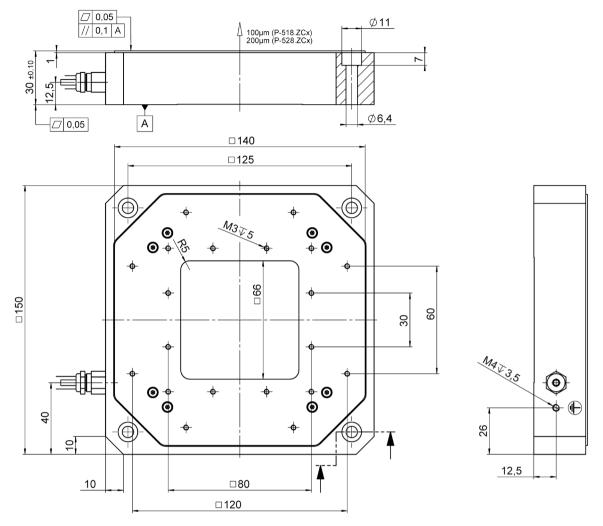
P-5x8.ZCx, dimensions in mm. Note that a comma is used in the drawings instead of a decimal point.
